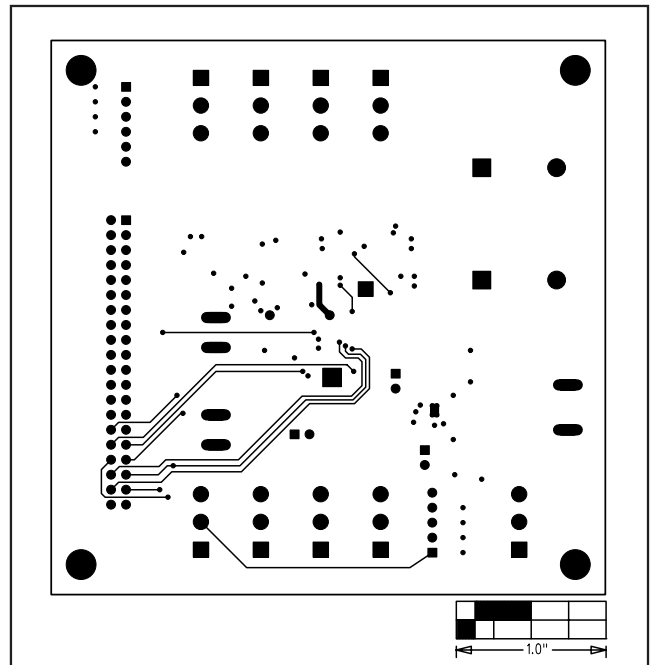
MAX13036 EV Kit PCB Layout—Solder Side
